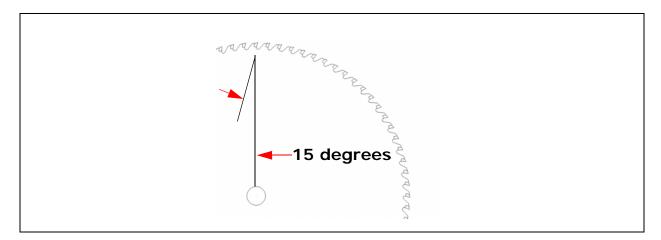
A typical metal cutting blade. Its teeth have no tooth hook.
